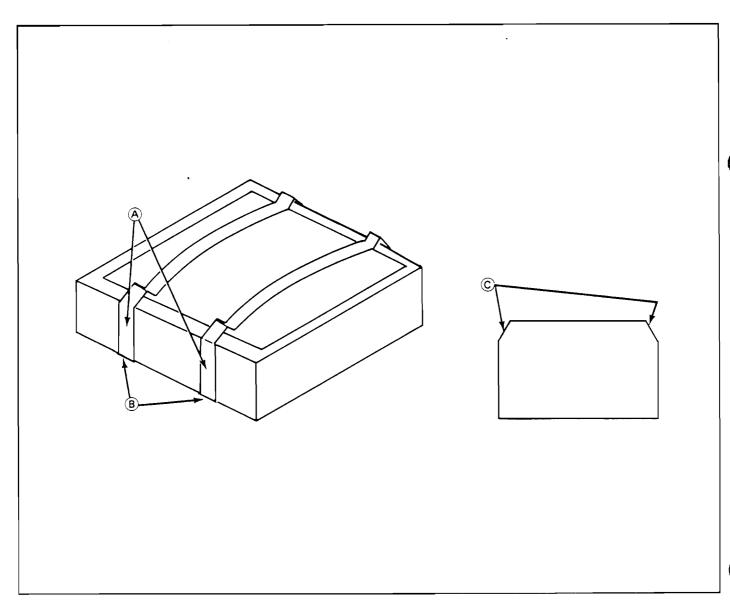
IOP Chip Socket with Chip and Retaining Clips in Place
